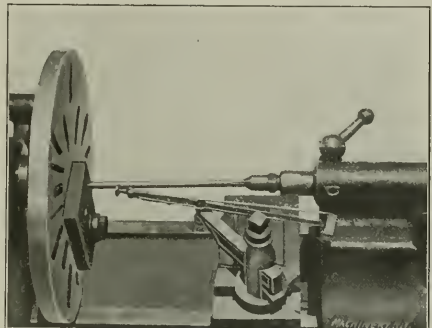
The "Just It" Lathe Test Indicator Centering a Prick-punch Mark.
